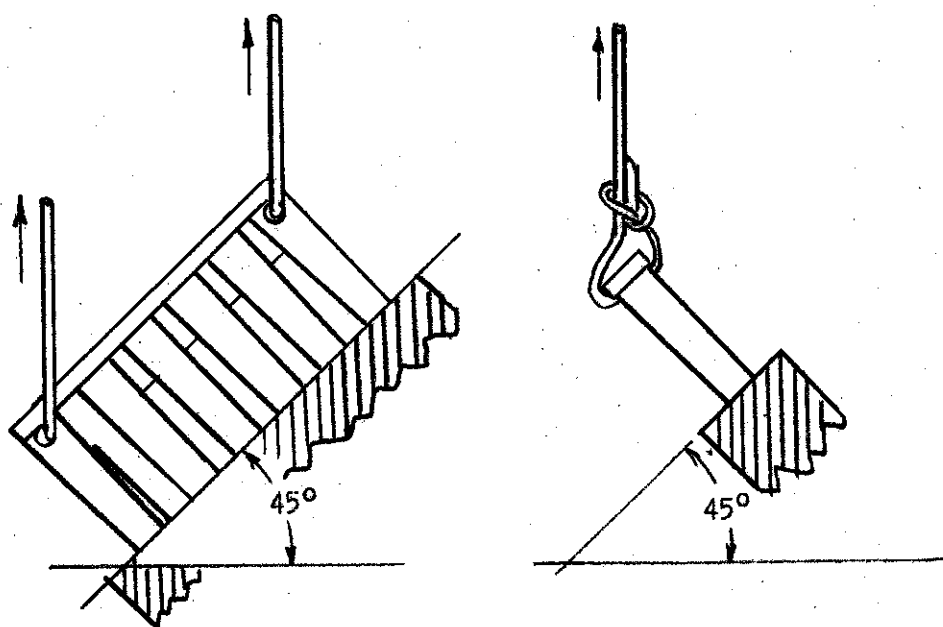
"Kojiri" Load Testing (6-Position Housing is shown)
